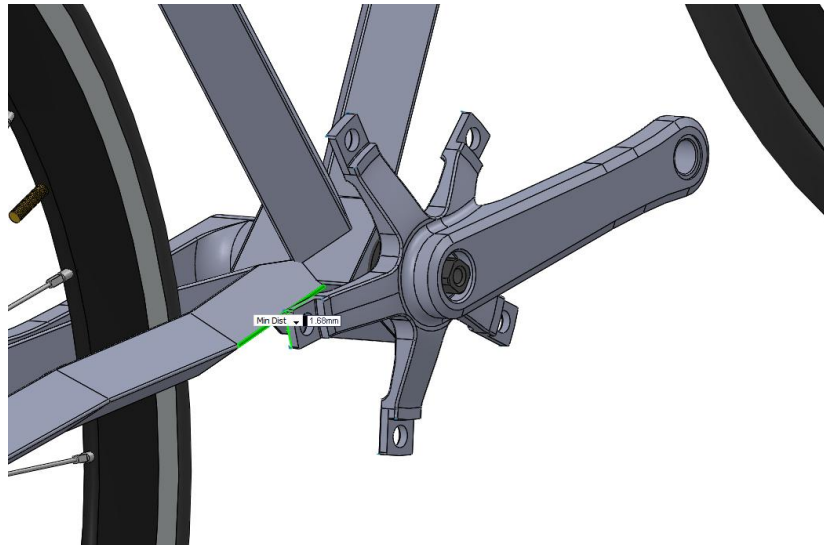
Offset between chainring and chainstay tube 1.7 mm
